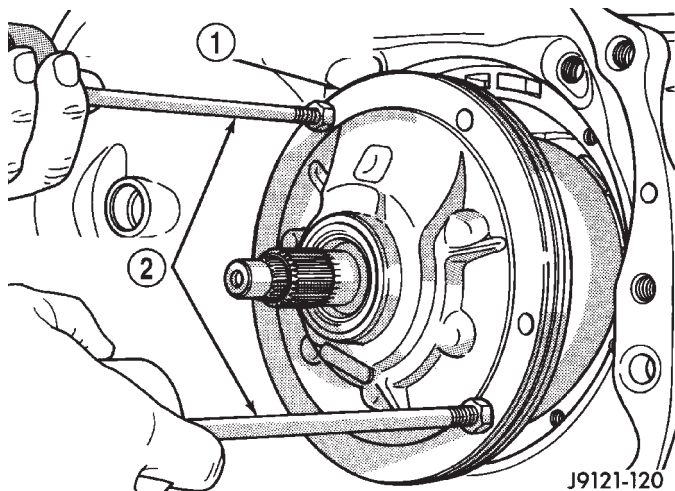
Removing Oil Pump And Reaction Shaft Support Assembly
